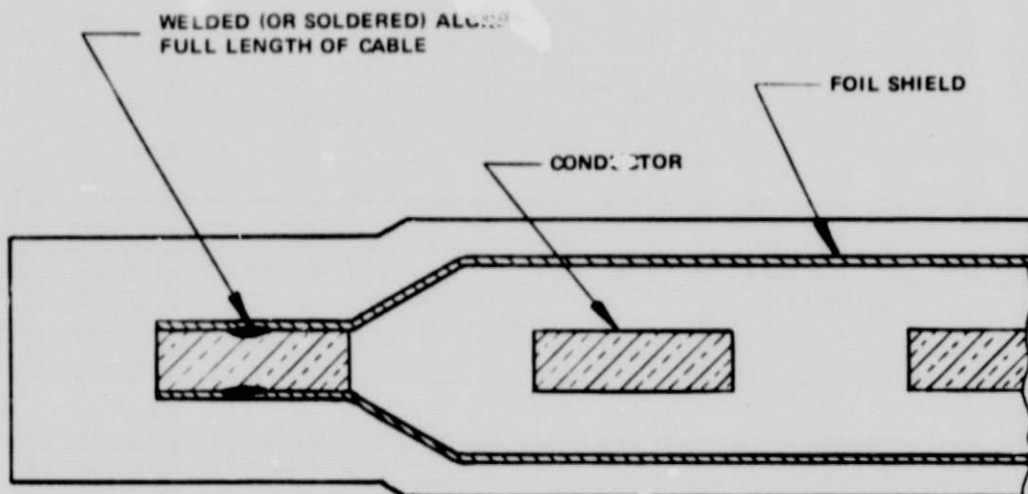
FCC with welded (or soldered) type shield contacts.
